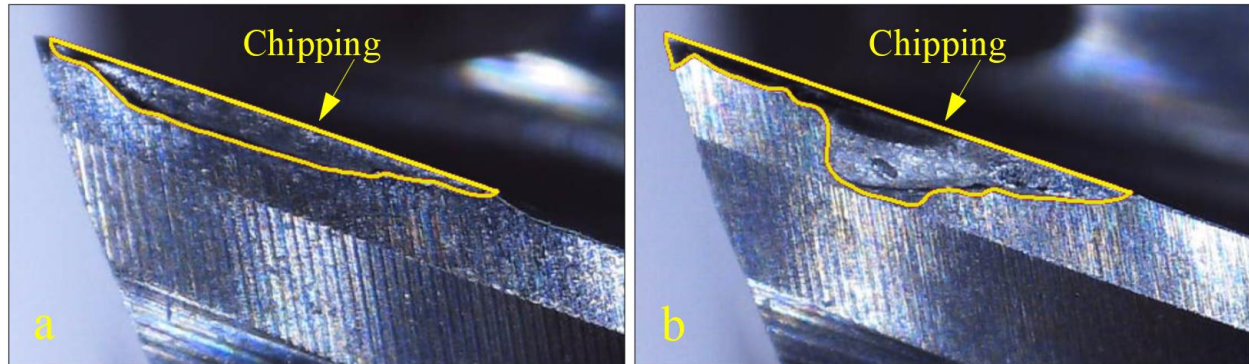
(a) the chipping on the tool #31 after cutting 8 inches of workpiece (b) the chipping on the tool #2 after cutting 8 inches of workpiece.
